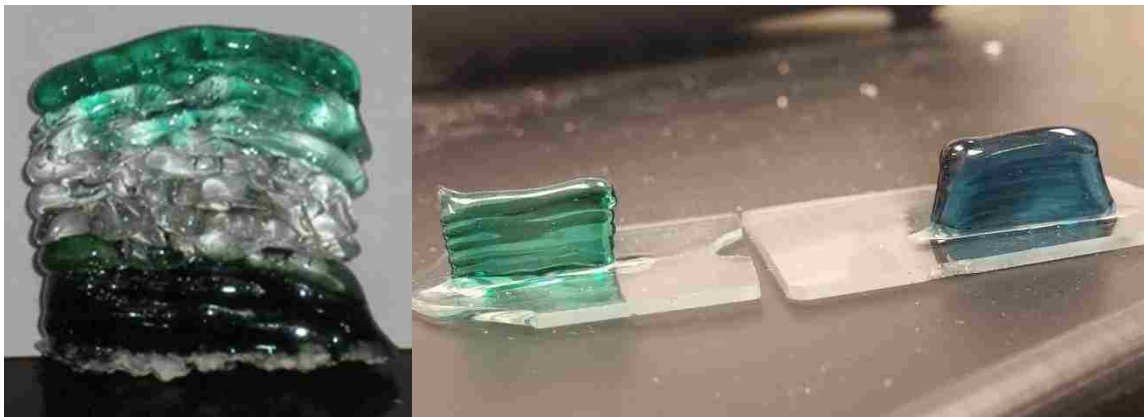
Wall Made with Prototype System and Hand Feeding on the Left, and Two Walls Printed on the New Glass AM system on the Right.
